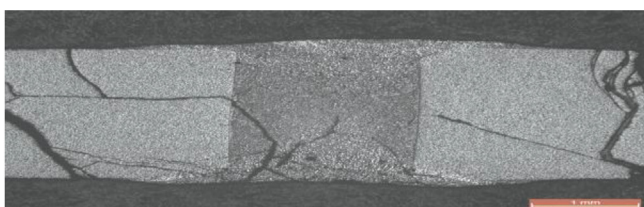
Gas tungsten arc weld of (ZSBY) composites with (ZSBY) filler material.
